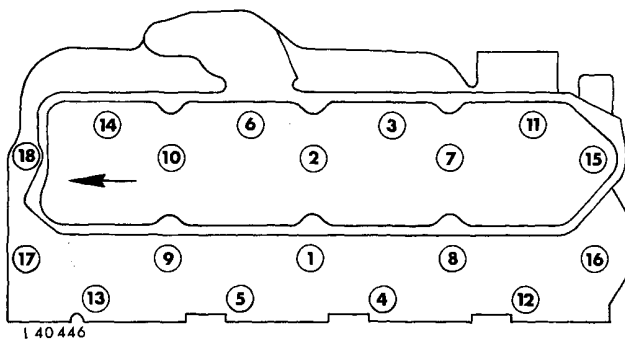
Correct Sequence for Tightening Cylinder Head Cap Screws
